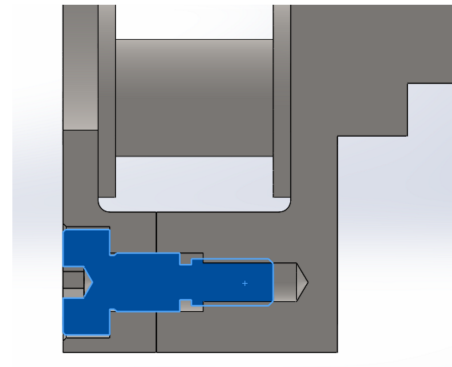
section detail of carrier flanges assembly with calibrated screw
